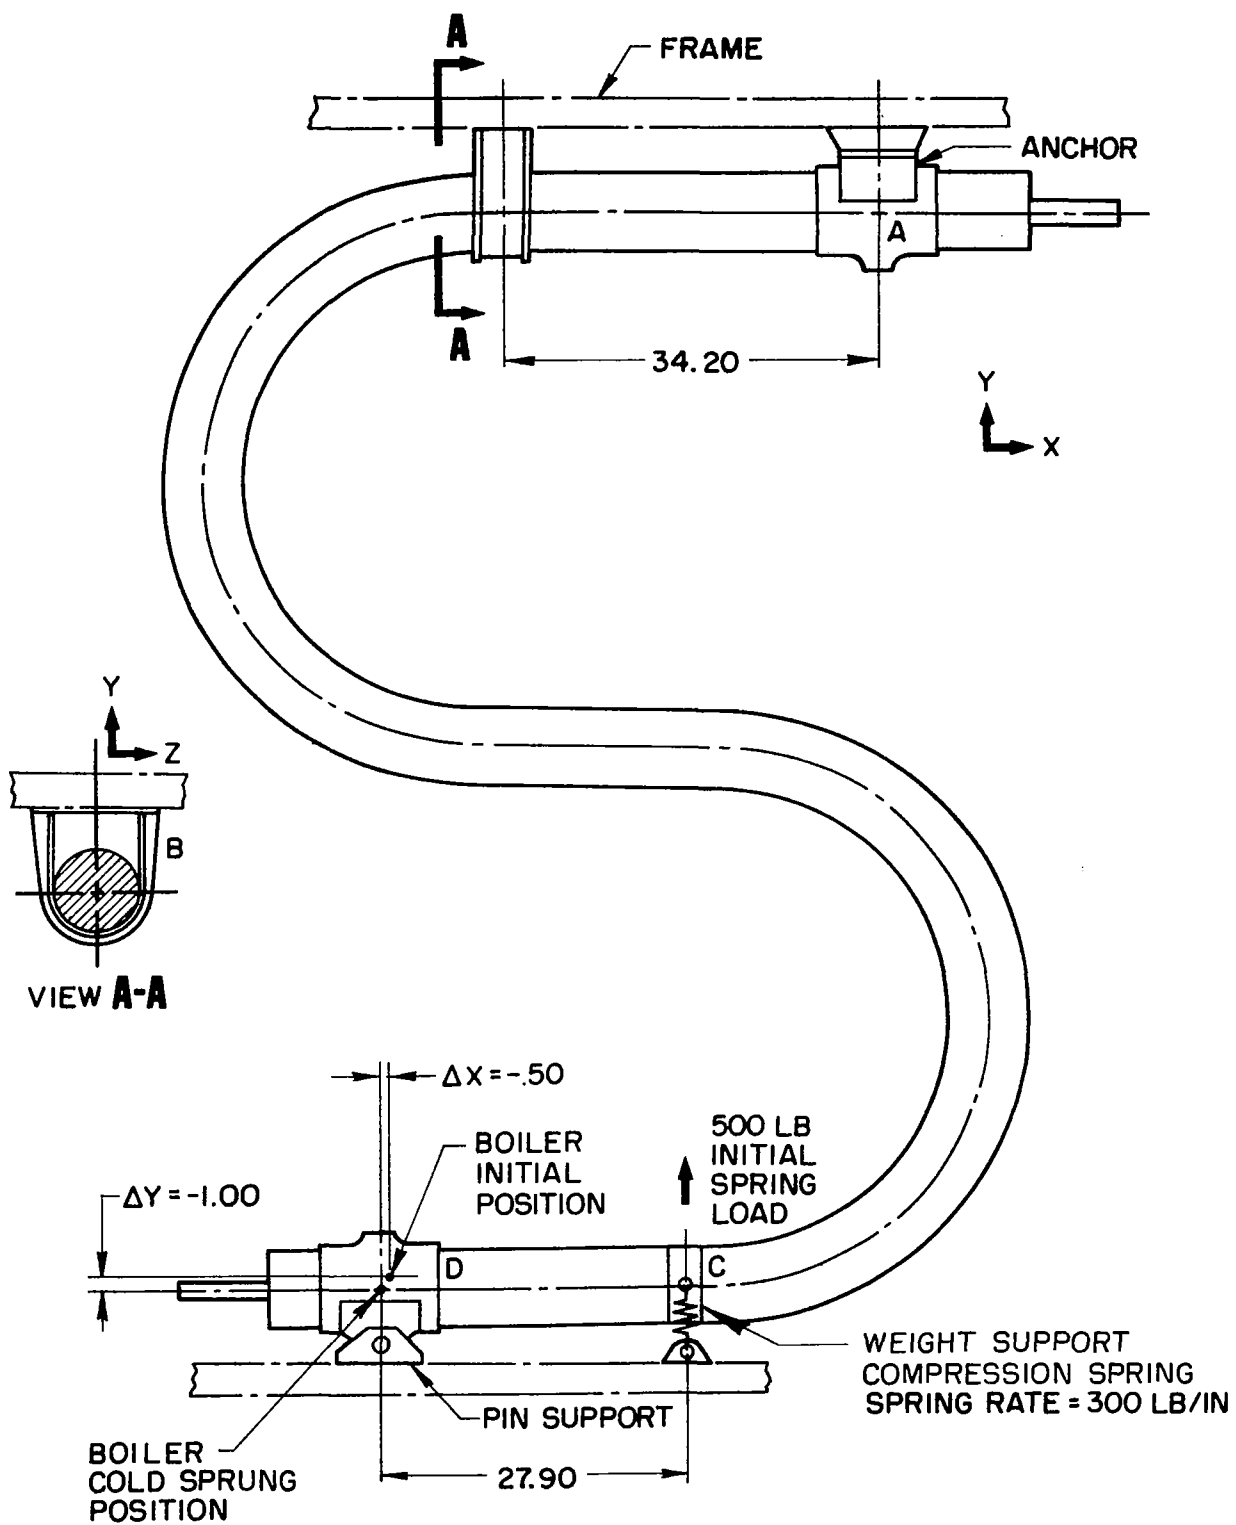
BRDC Boiler No. 5 Mounting Scheme
